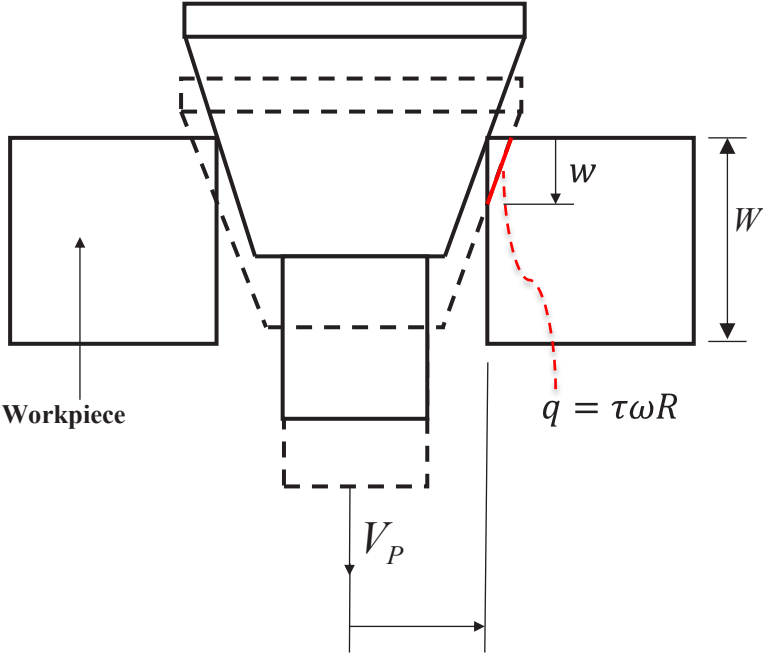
Plug and workpiece interaction showing contact surface and heat flux. ¹
